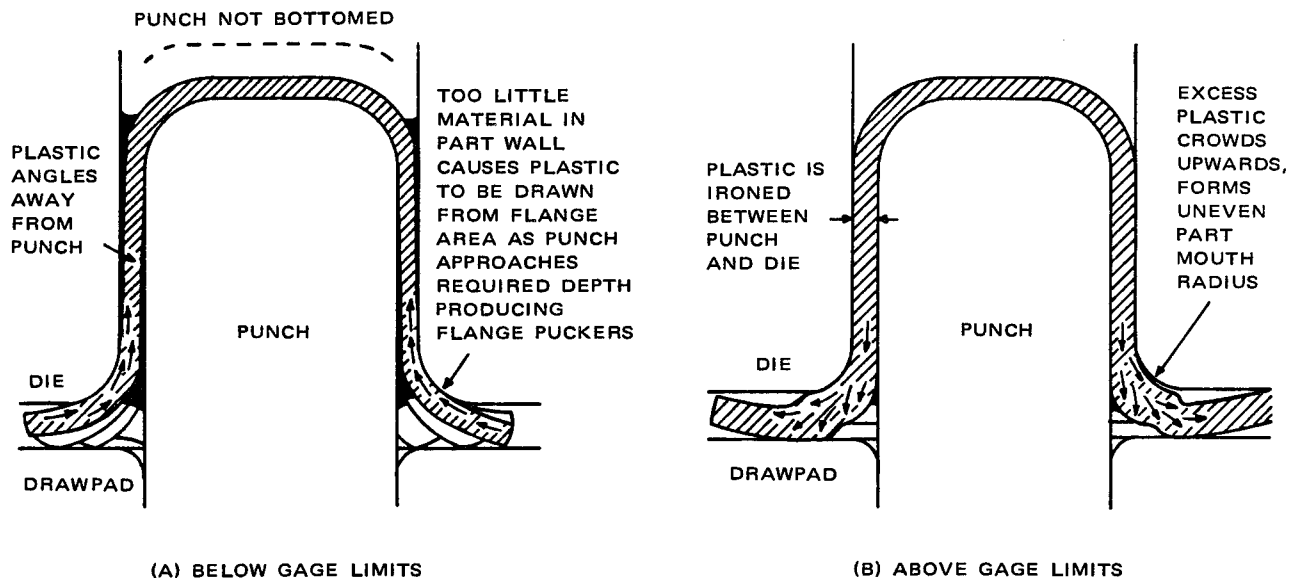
Drawing operations as adversely affected by sheet gage limits (9)
